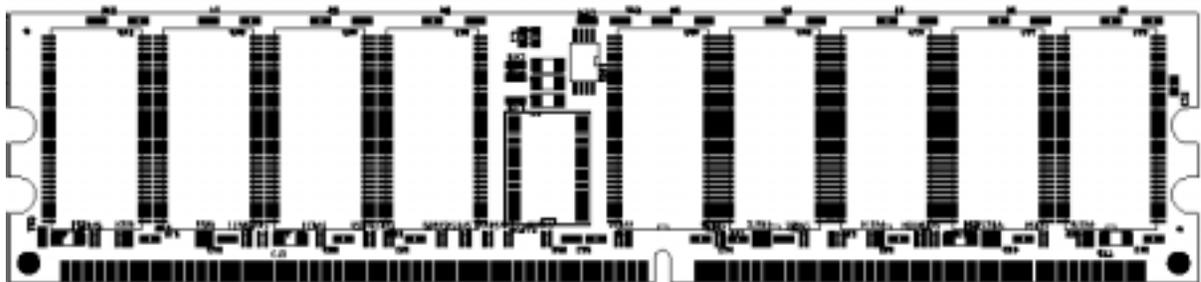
One Side of DIMM With SDRAMs, PLL, and SPD Mounted
